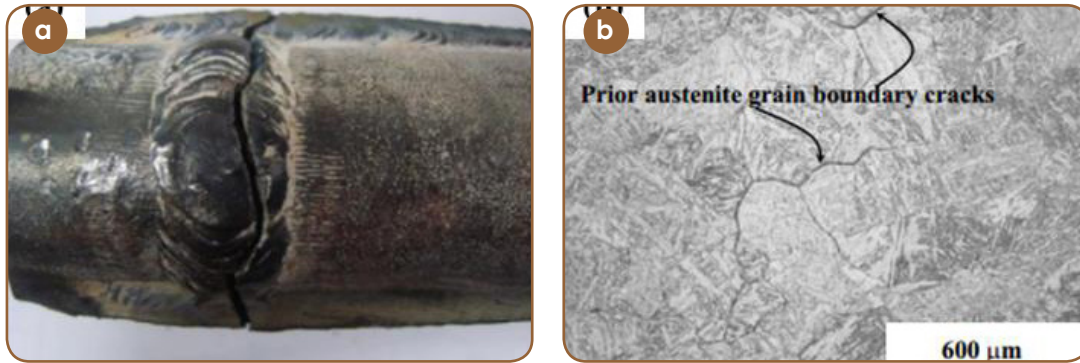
Reheat cracks in the weld metal of a T23 steel tube in a fossil fuel power plant: a) image of the damaged tube and b) optical microscope image of microstructure in the damaged region of the tube [8]
